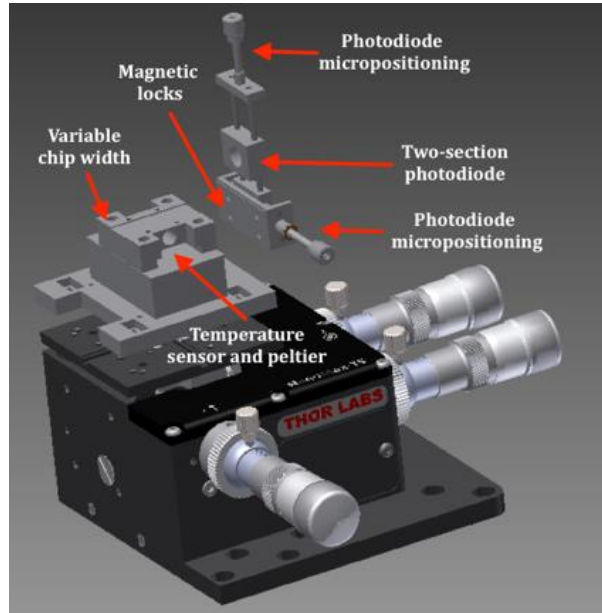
Frontal view of the detailed assembly of mechanical holders and micro positioning systems.
